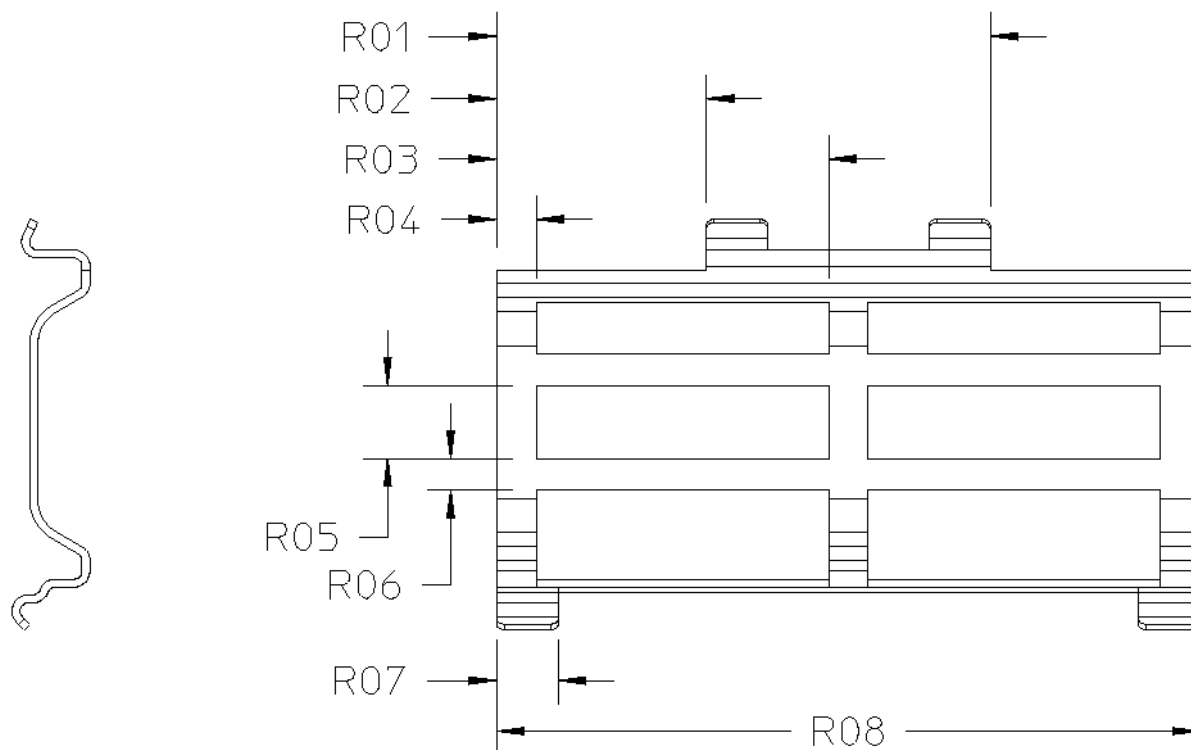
CAGE HEAT SINK ATTACHMENT CLIP
